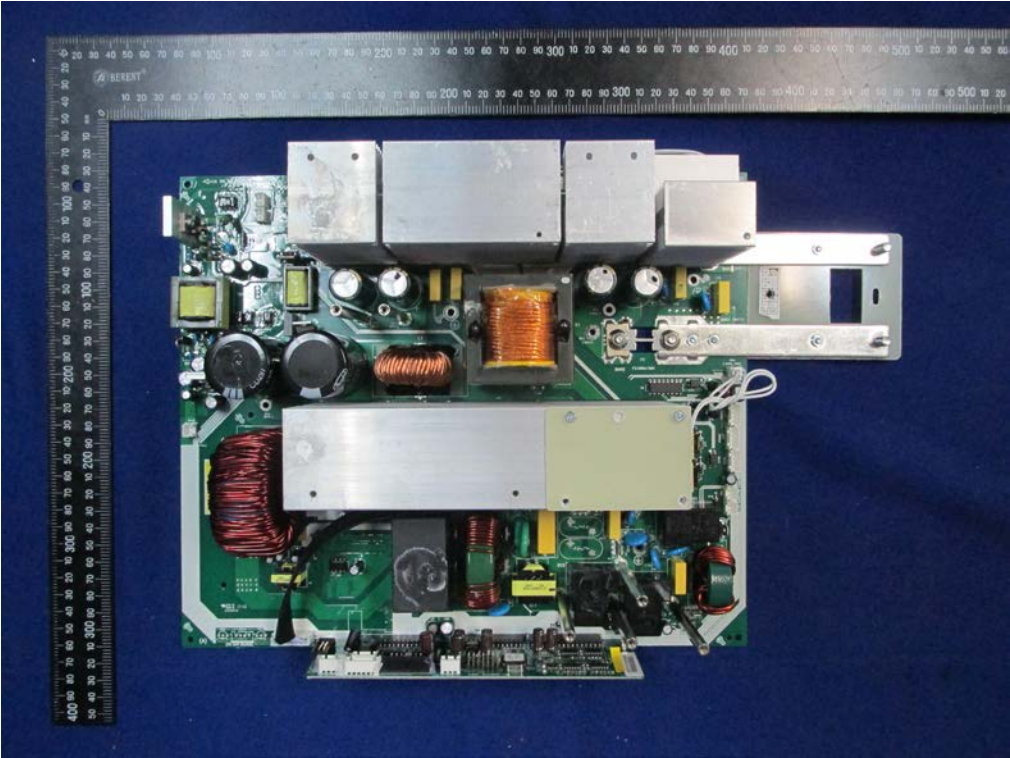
FlinInfini Lite 5kW-48V PCB of main board components view
